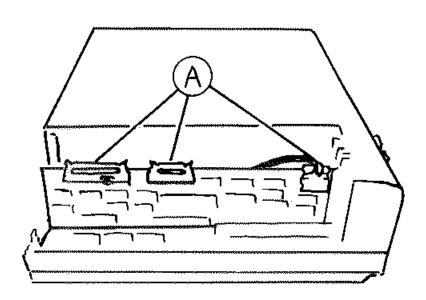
APX-T BOARD REMOVAL/REPLACEMENT
